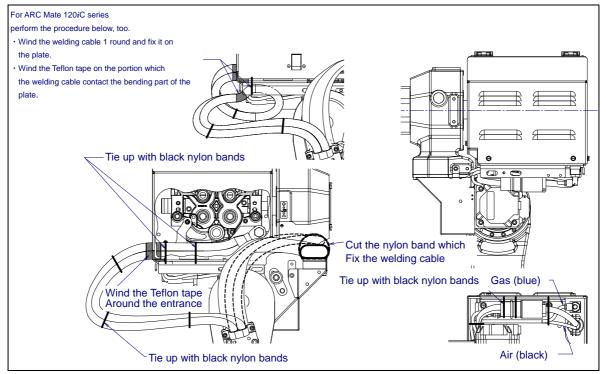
(d) Wiring of the Wire Feeder Auto drive 4R220 (1/2)
